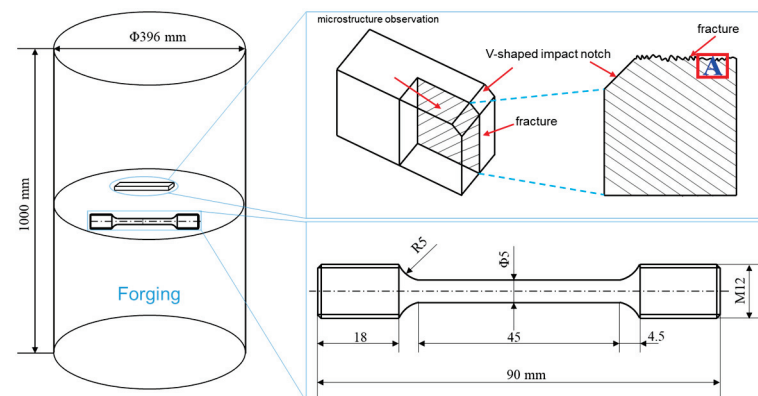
Forging size and sampling position and size of tensile specimen and impact specimen.
